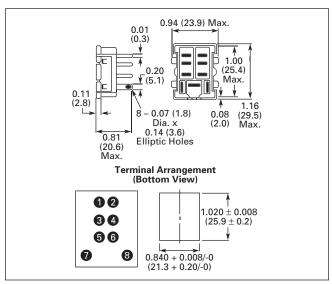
D7PA5 Panel Mount — Approximate Dimensions in Inches (mm)
